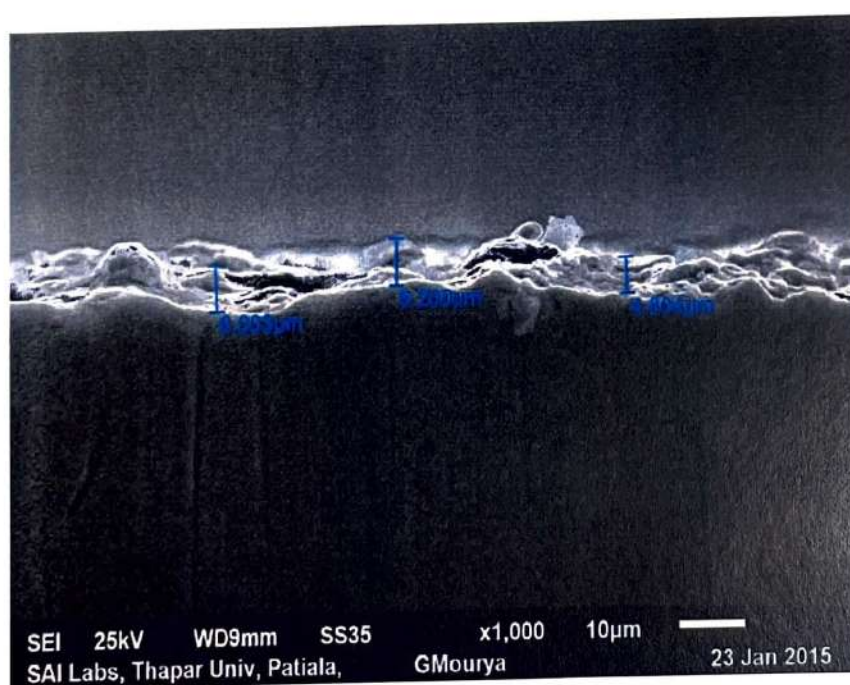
SEM Image of Machined Surface after Trim Cut using 3 g/L Si Powders in Dielectric
